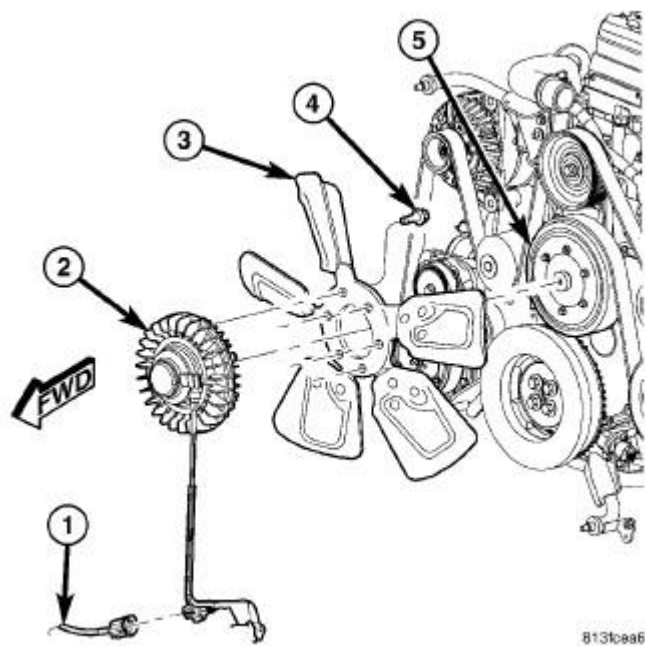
FAN BLADE/VISCOUS FAN DRIVE
